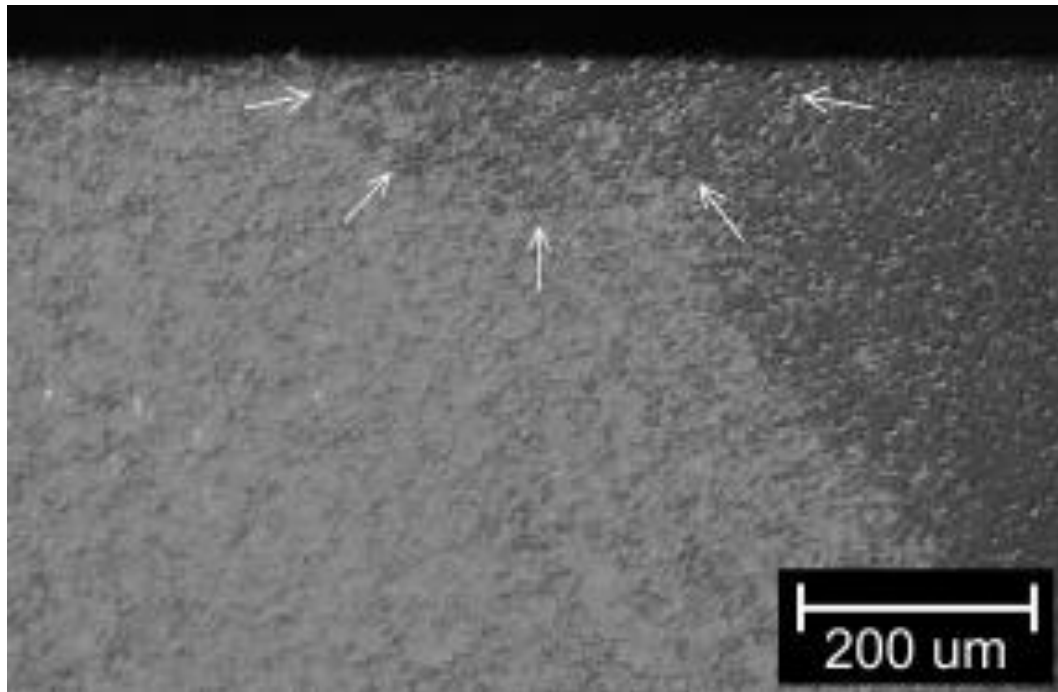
Optical image of a fracture surface from a specimen that did not fail during the experiment using the Olympus stereomicroscope with the DinoEye capture device, the specimen was statically fractured post-experiment.
